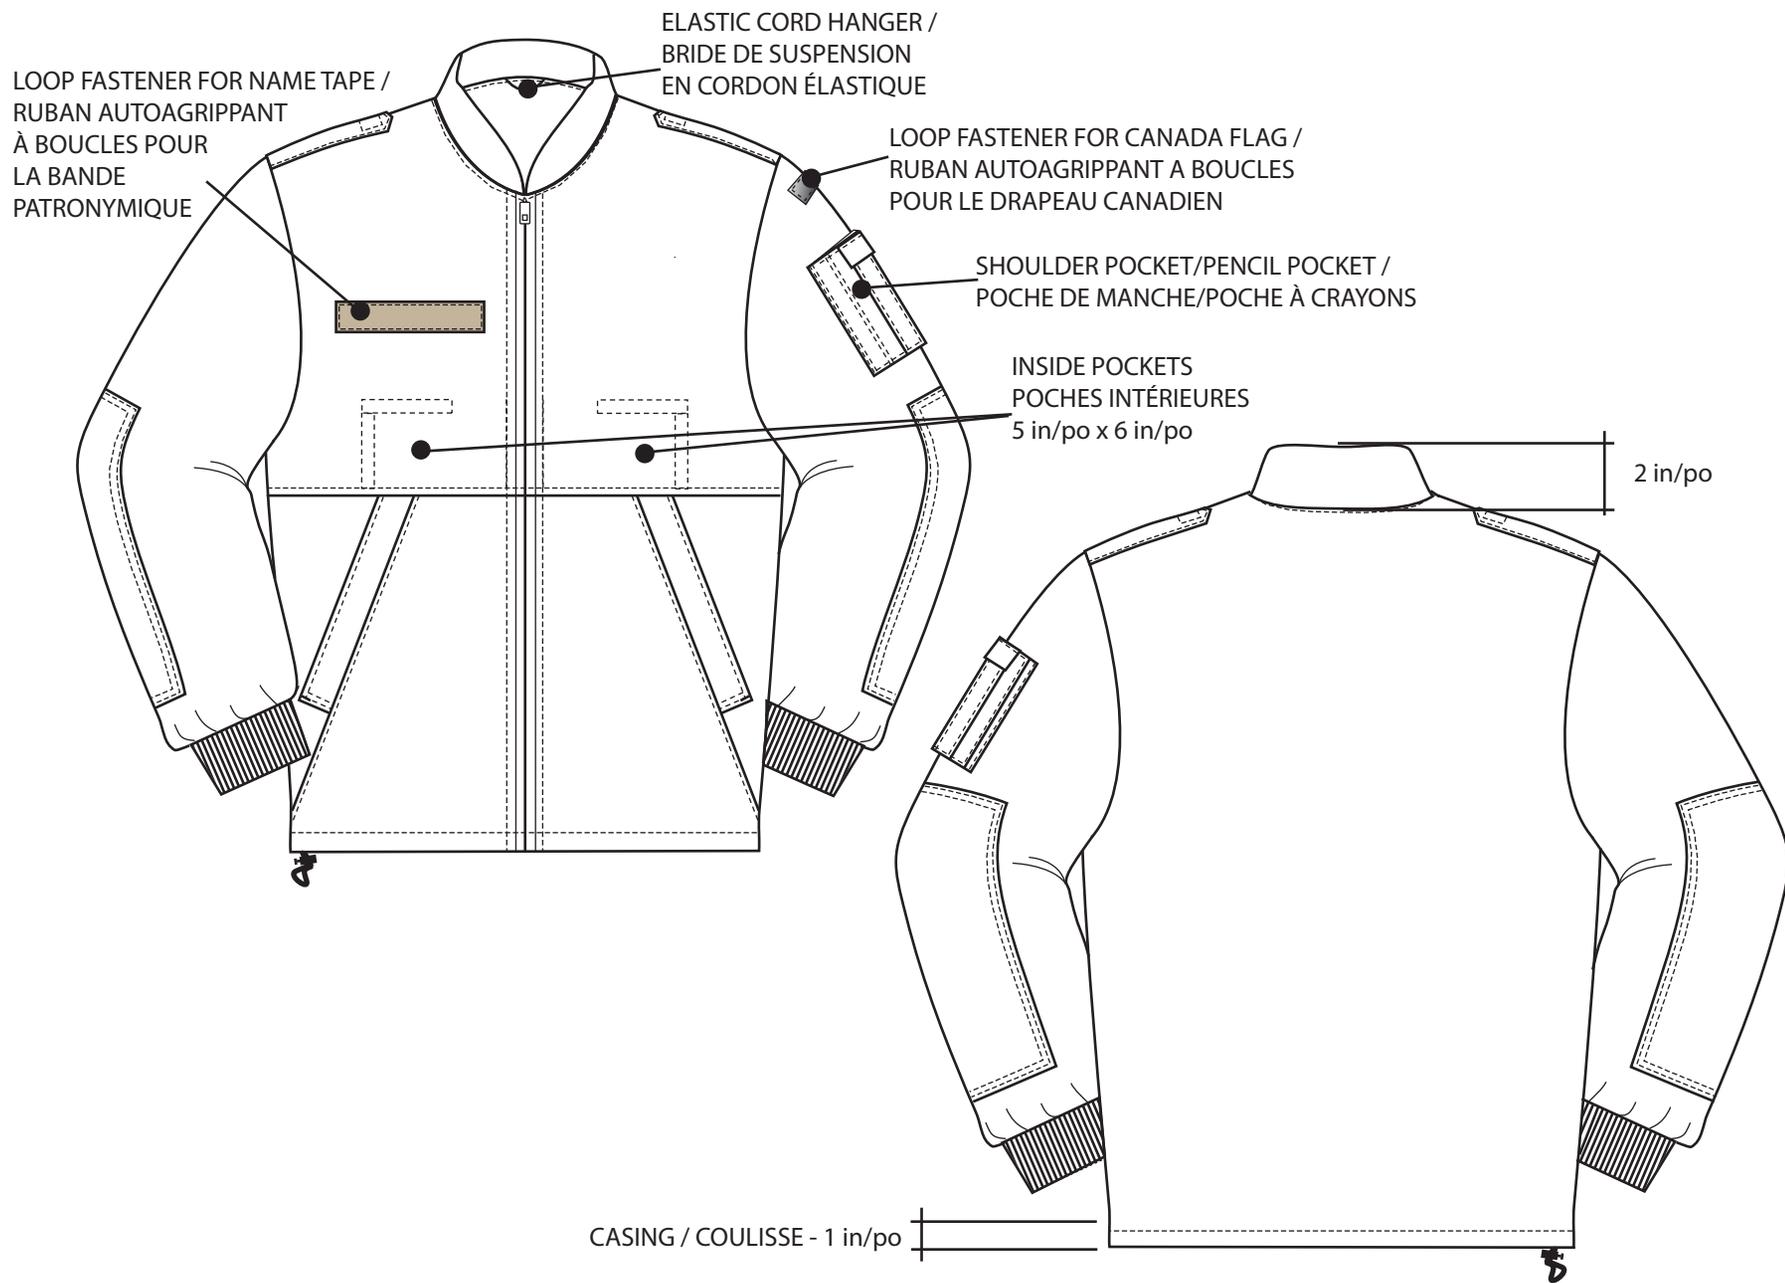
DIMENSIONAL DETAILS / DÉTAILS SUR LES DIMENSIONS
